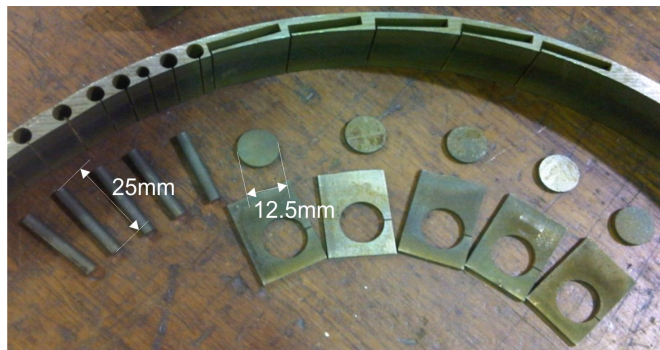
Specimens obtained for testing of thermal temperature-dependent material properties - Machined from clad and HAZ layers using wire EDM process.
